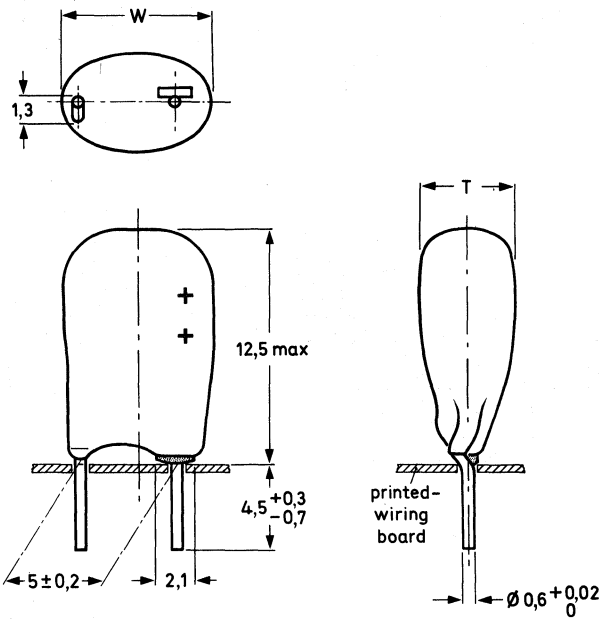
Style 1; see Table 1a for dimensions T and W.
